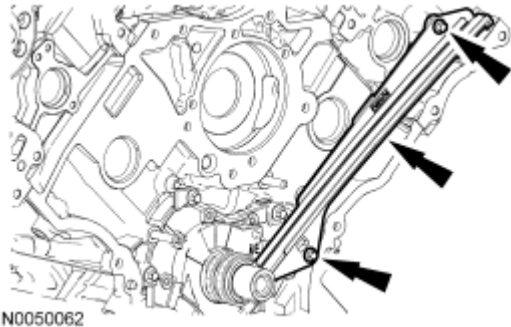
Locating LH Primary Timing Chain Guide Bolts
